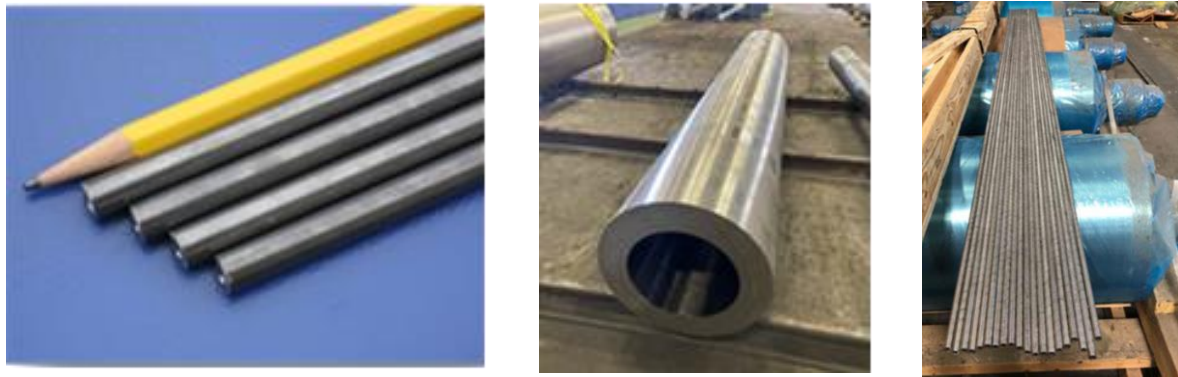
Left cold drawn seamless tube for SunShot (7.4 mm OD x 1.1 mm W), Center extruded pipe for AUSC ComTest (560 mm OD x 100 mm W), Right welded and redrawn tube for Gen 3 CSP (9.5 mm OD x 2 mm W)
